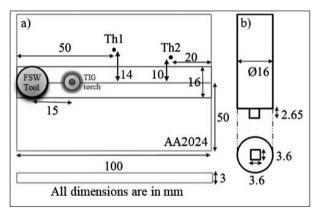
Schematic illustration of FSW experimental details a) thermocouple placement, plate dimensions, TIG torch placement, and b) FSW tool dimensions.
